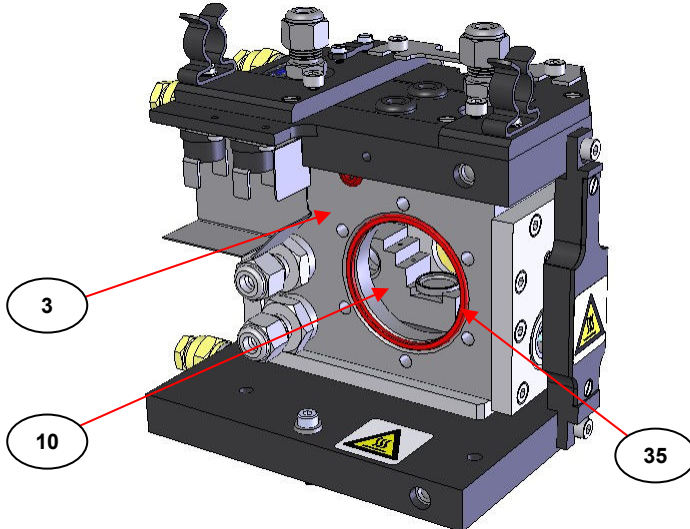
HTHP Cell with Wide Heat Shield (32) and Window Assembly Fixing Bolts (30) and Window Assembly (11) Removed
